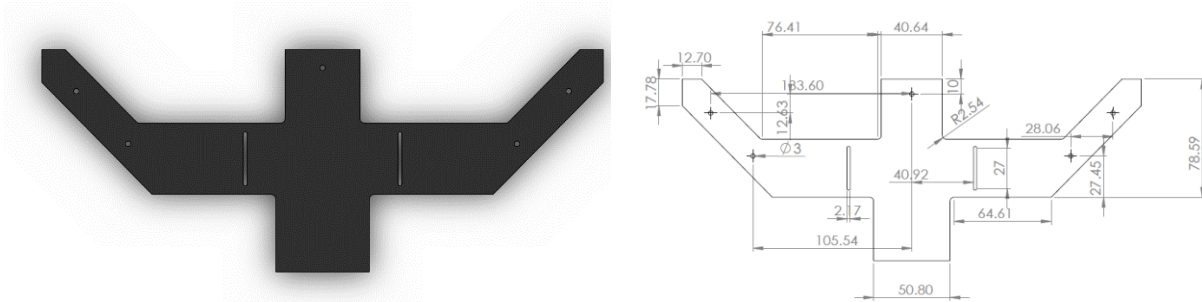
The CAD drawing of the UAV mounting bracket pattern without (left) and with (right) dimensions. Dimensions in diagrams are in millimeters.
